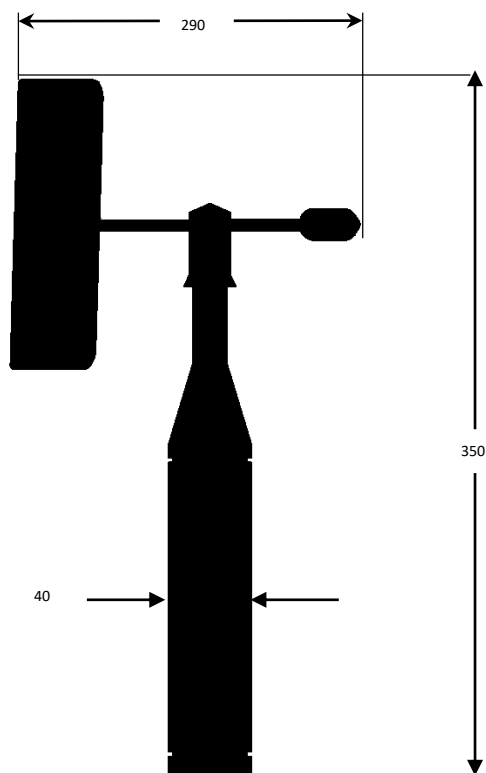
SB-DS Dimensional Drawing s- all dimensions in mm.
